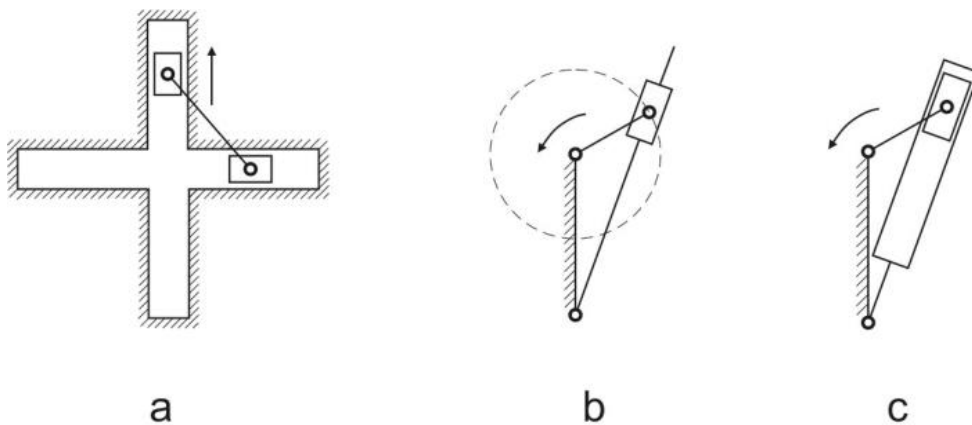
Kinds of crank mechanisms a) rectangular slider crank mechanism, b, c) crank slider mechanisms with rotating cylinder
